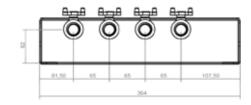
The drawing and dimensions of the Mounting Plate with Ball Valves and Flushing By-pass of CIU
